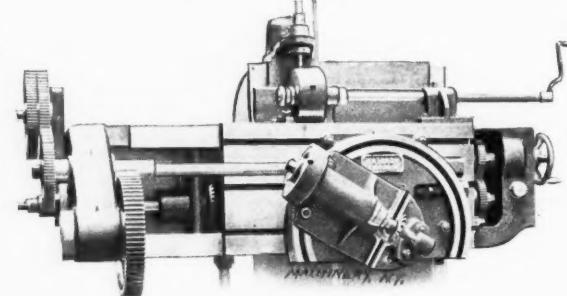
Helical Gear-cutting Attachment used with the Atlas Gear-cutting Machine shown in Fig. 34.
